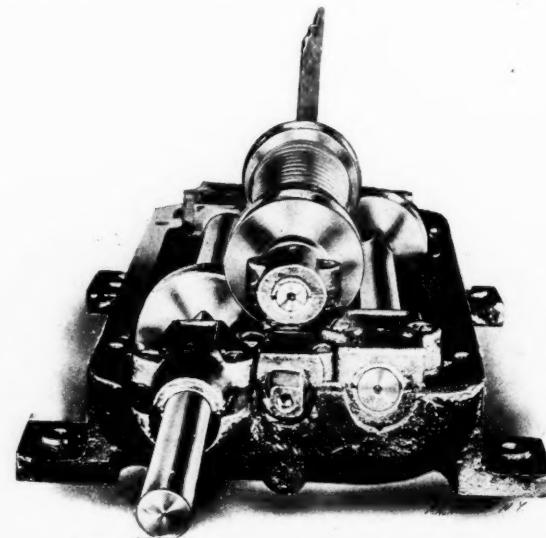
End View of the Drive, showing the Method of Supporting and Shifting the Intermediate Shaft to change the Speed.
